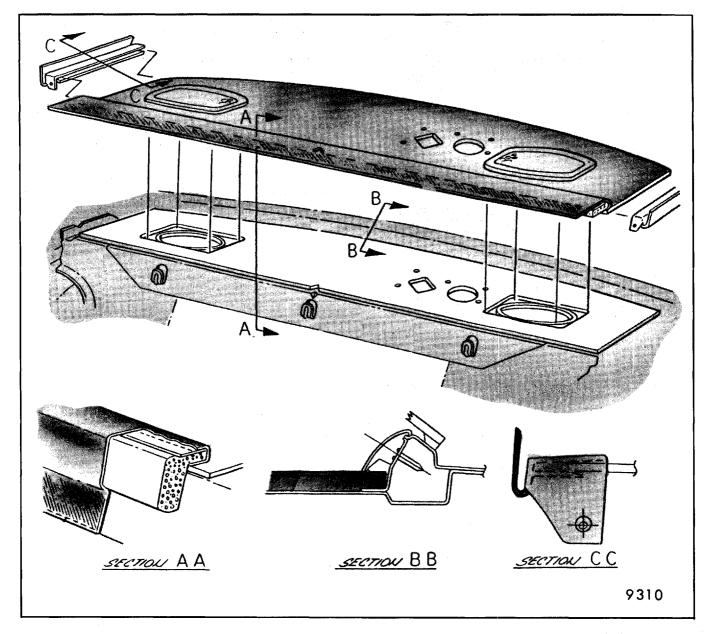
Rear Seat to Back Window Trim Finishing Panel - B- 69 Style Shown (Other Styles Similar)
